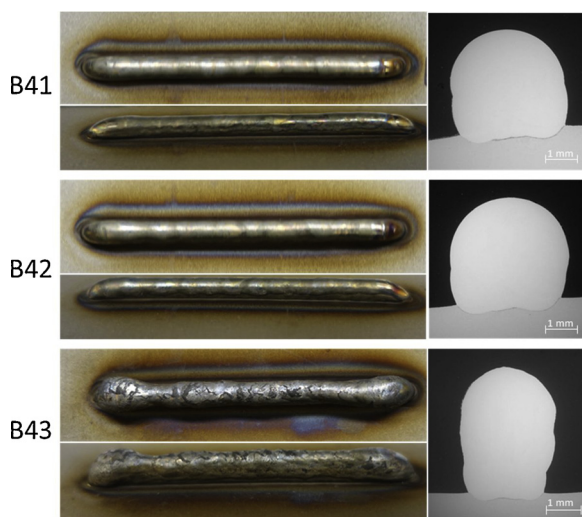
Multiple layer specimens shown in two views with cross section on right.
